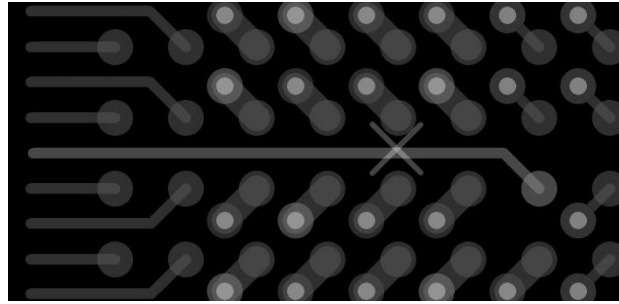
Diagram of Long Traces Between BGA Surface Pads
